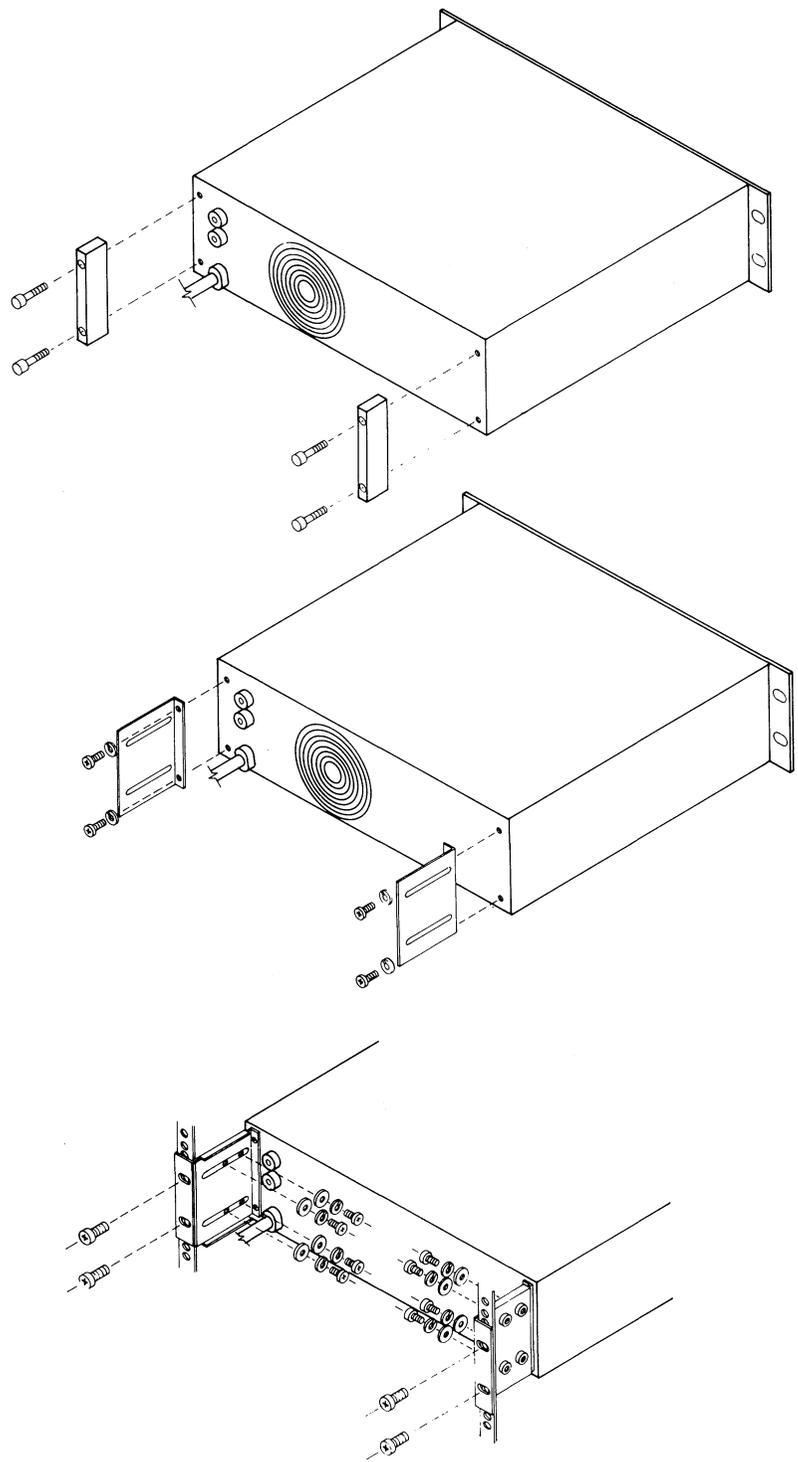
Installing the Rack Mounting Rear Support Braces
